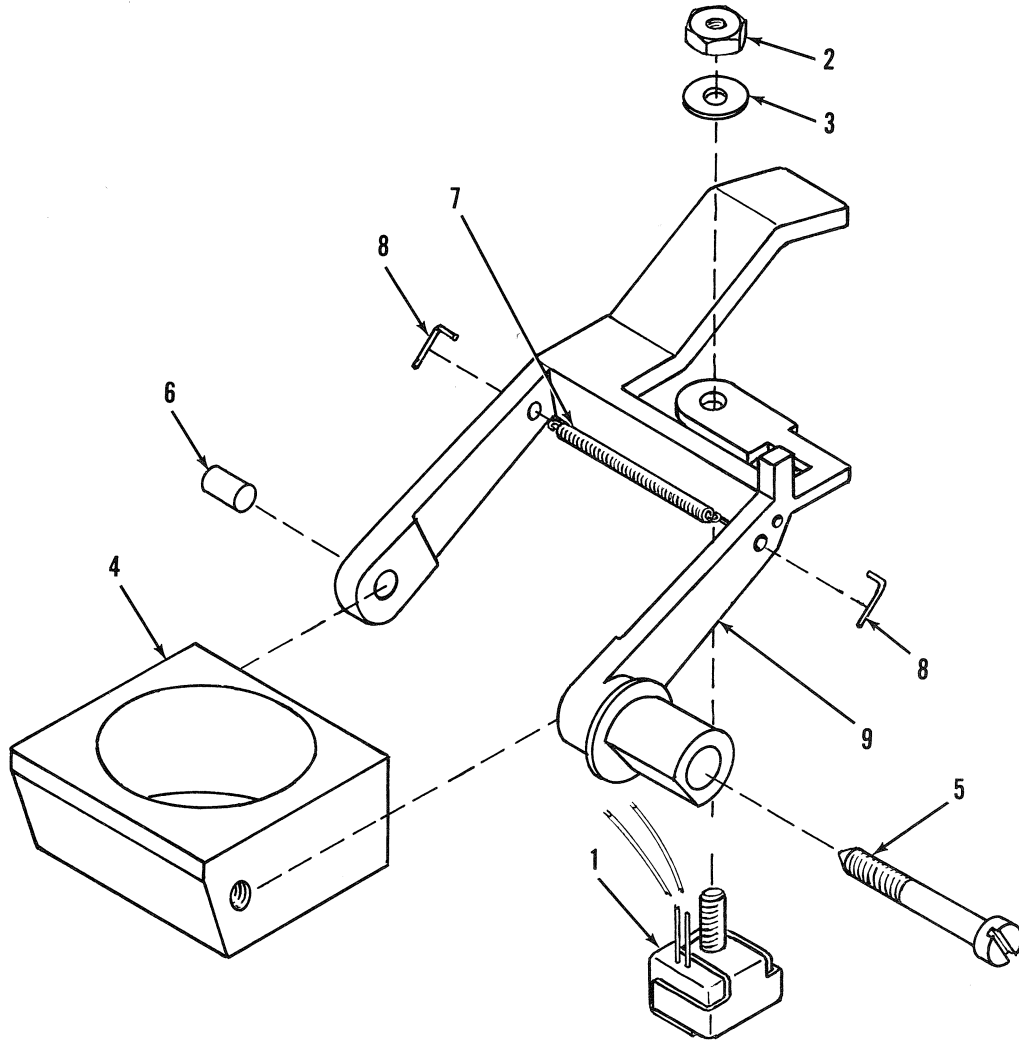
ERASE HEAD AND YOKE ASSEMBLY
